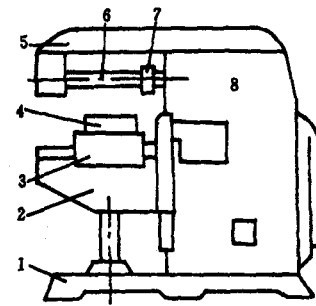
A sketch of a plain horizontal knee-type machine
